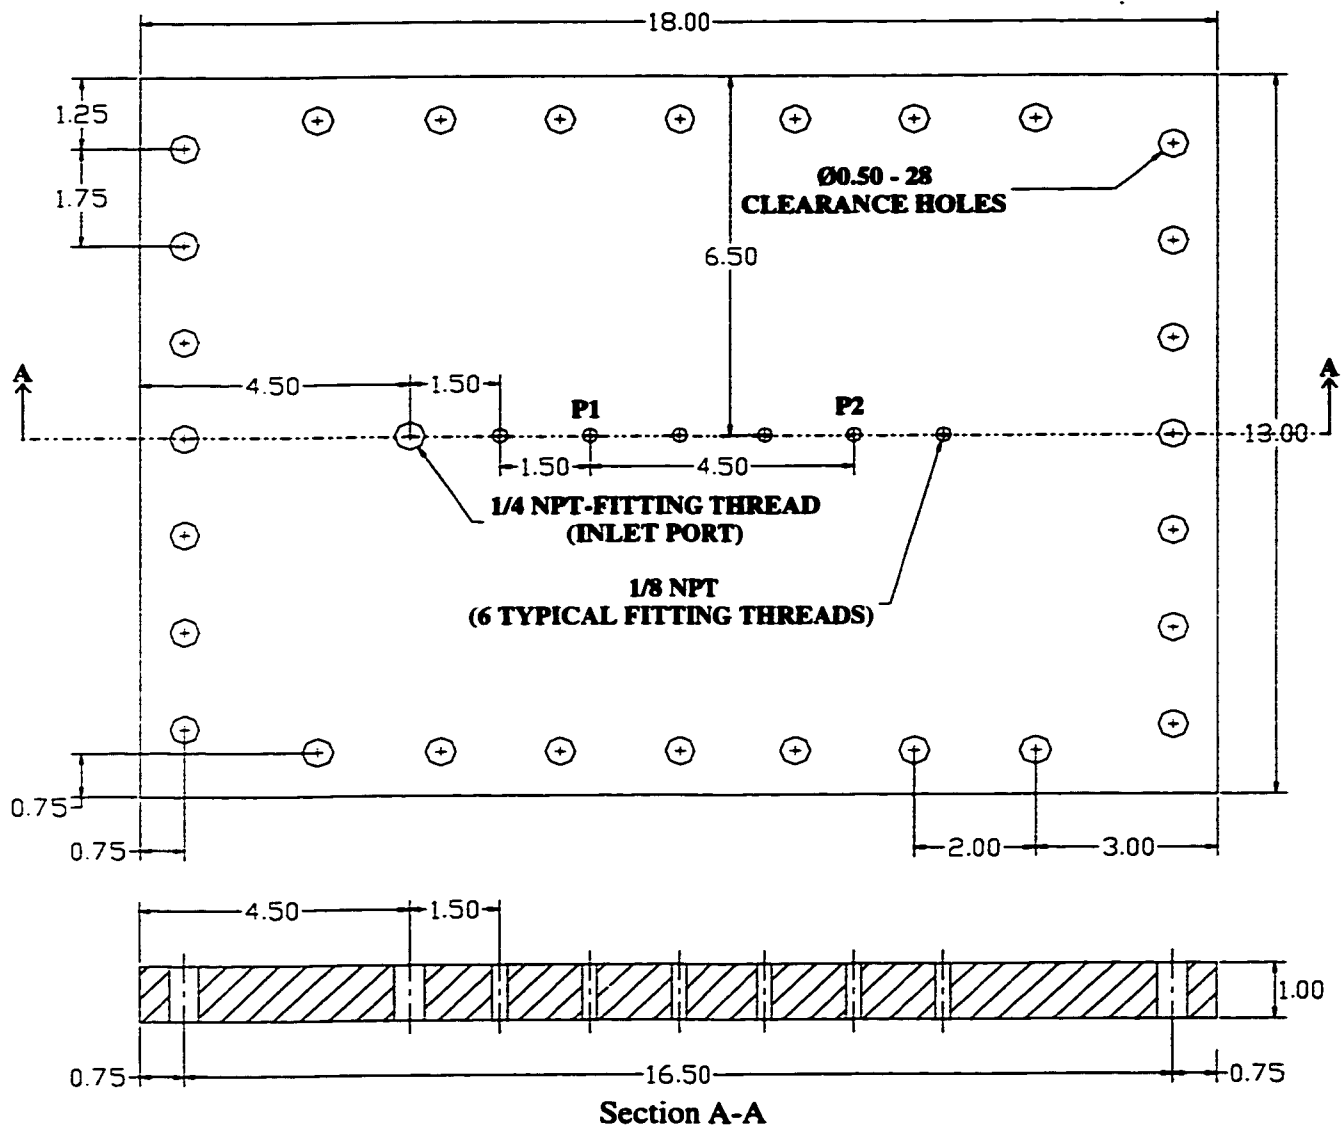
Rubber spacer of the motor oil mold (Dimensions are in inches).
